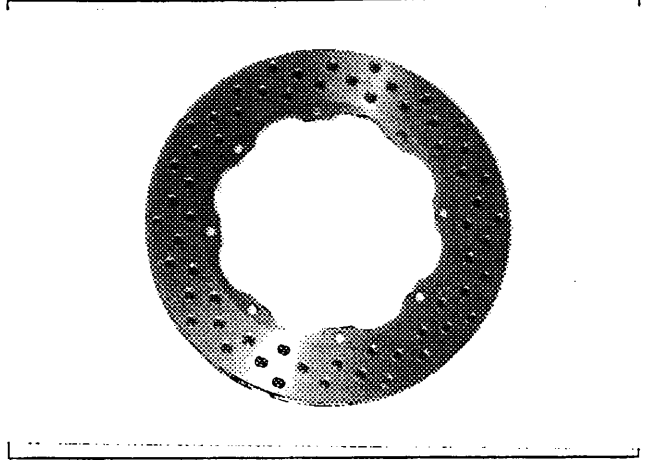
FRONT AND/OR REAR BRAKE DISC
